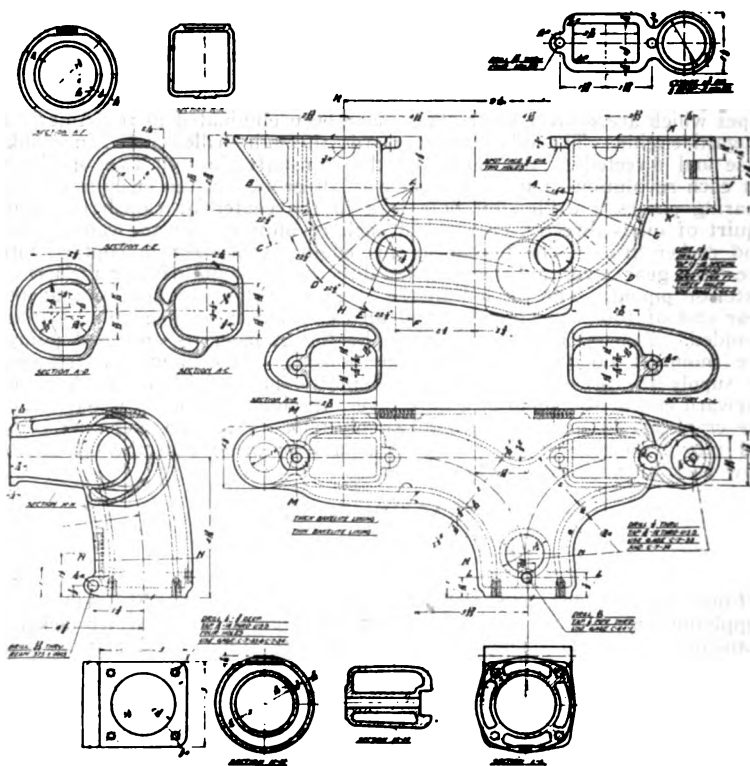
Details of Gas Inlet Manifold—Front right and rear left
